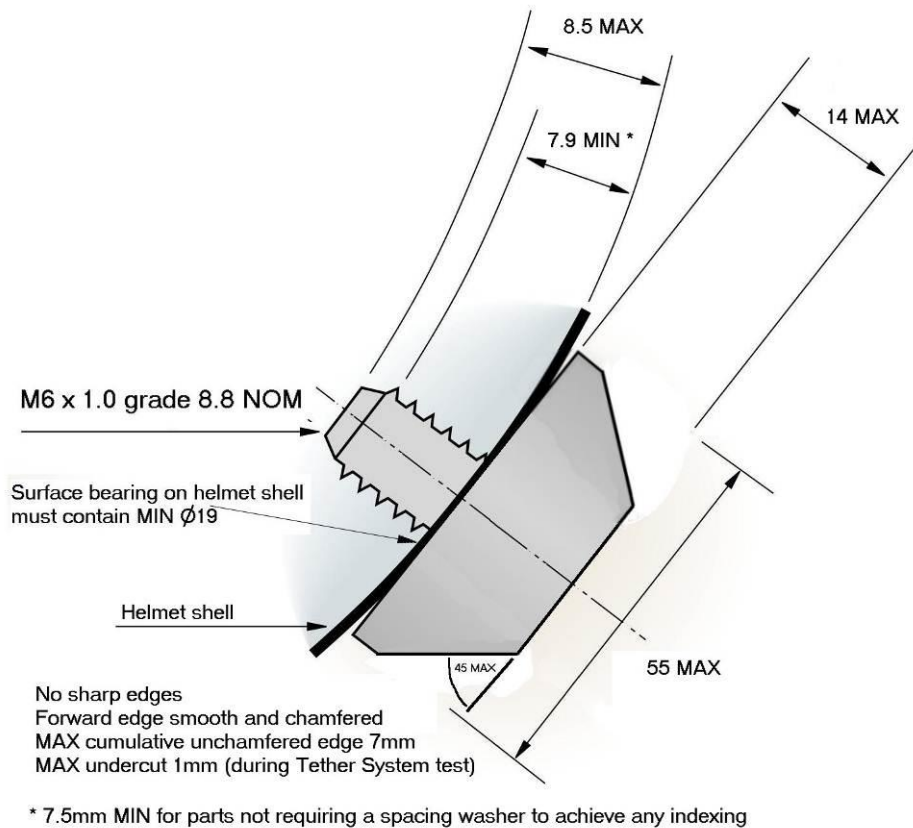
Geometrical requirements for Helmet-M6-Anchorage
